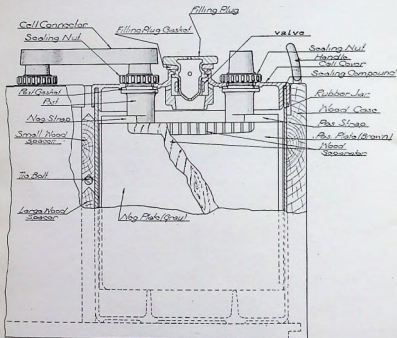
Section of Battery—Burned Connections, Double Flange Cover
